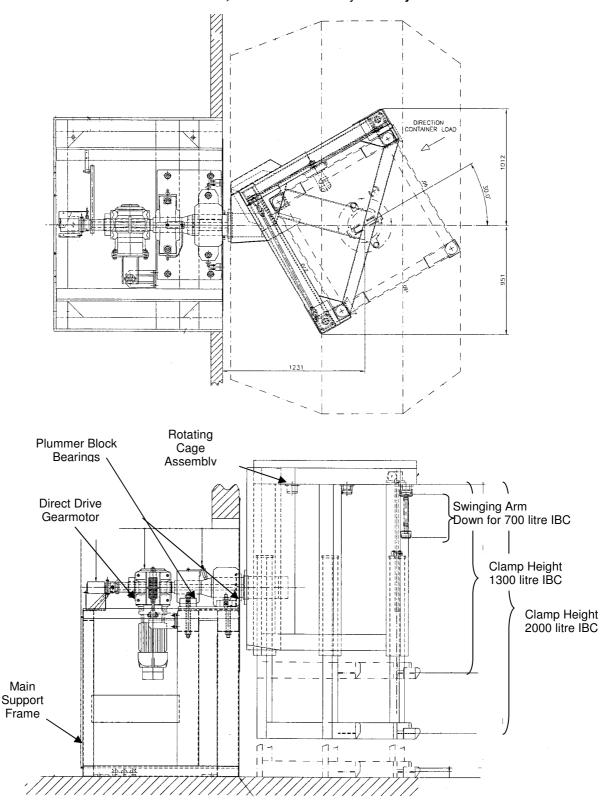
SP2000 Blender - Construction Drawing (Plan & Side Views)
